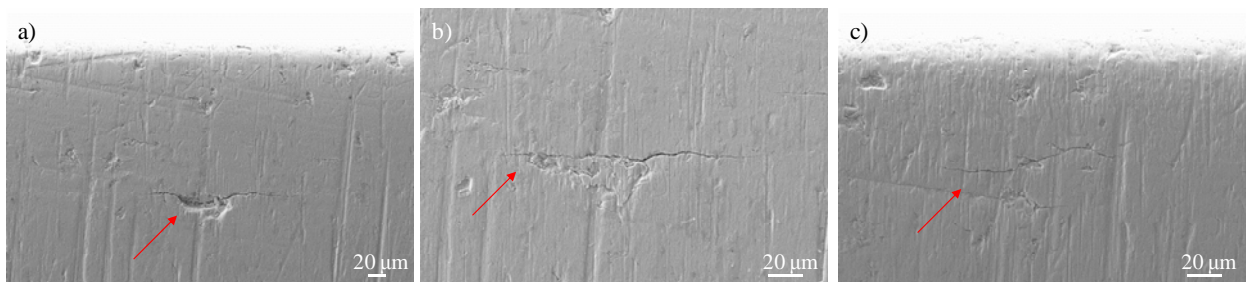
Microcracks at the flank face of the UNIVERSAL lower tool with carbides aligned following the stroke direction at: a) 10000 strokes and b) and c) 15000 strokes
